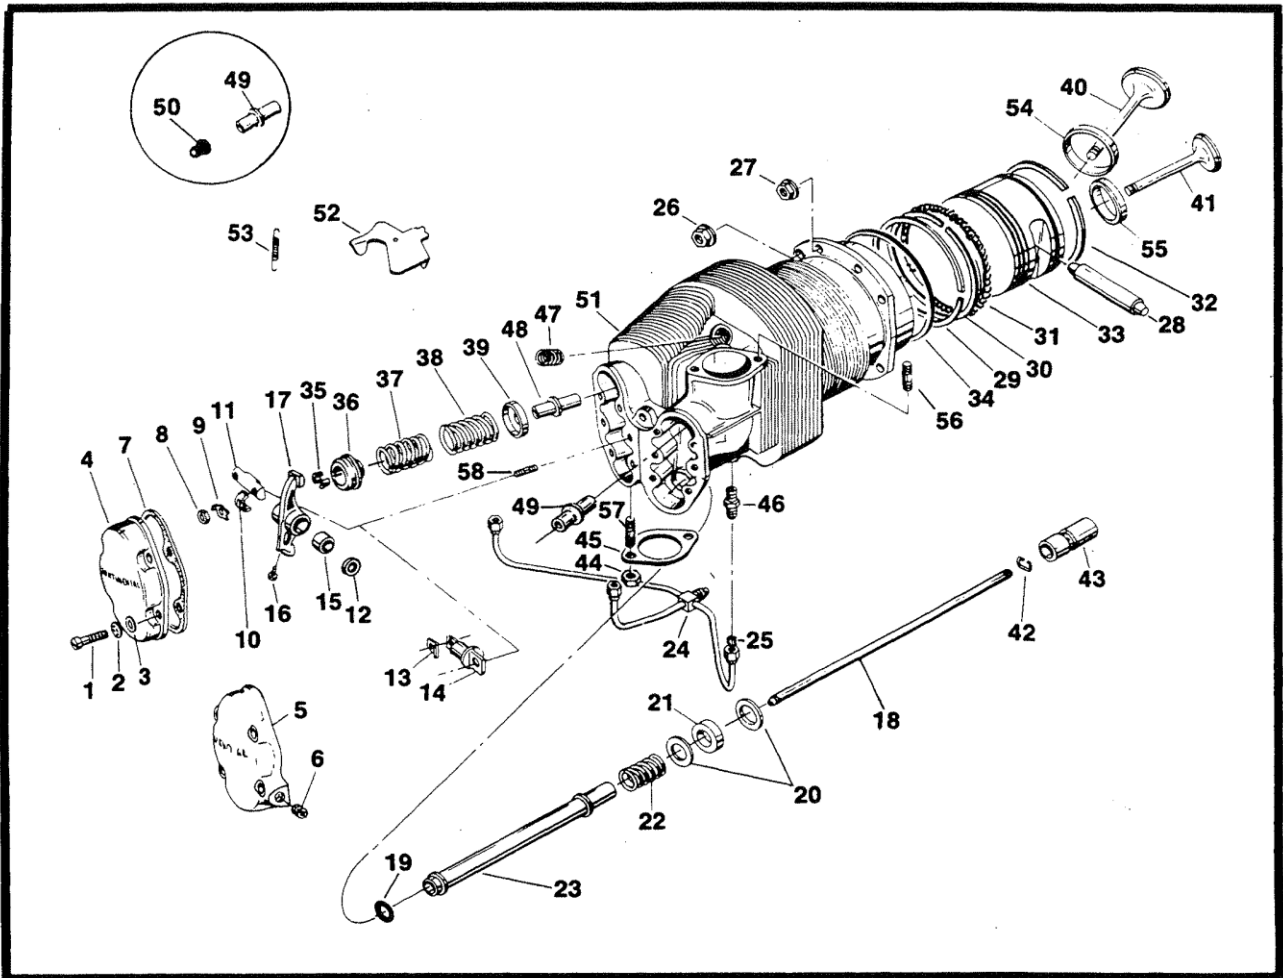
CYLINDER AND PISTON ASSEMBLY.
